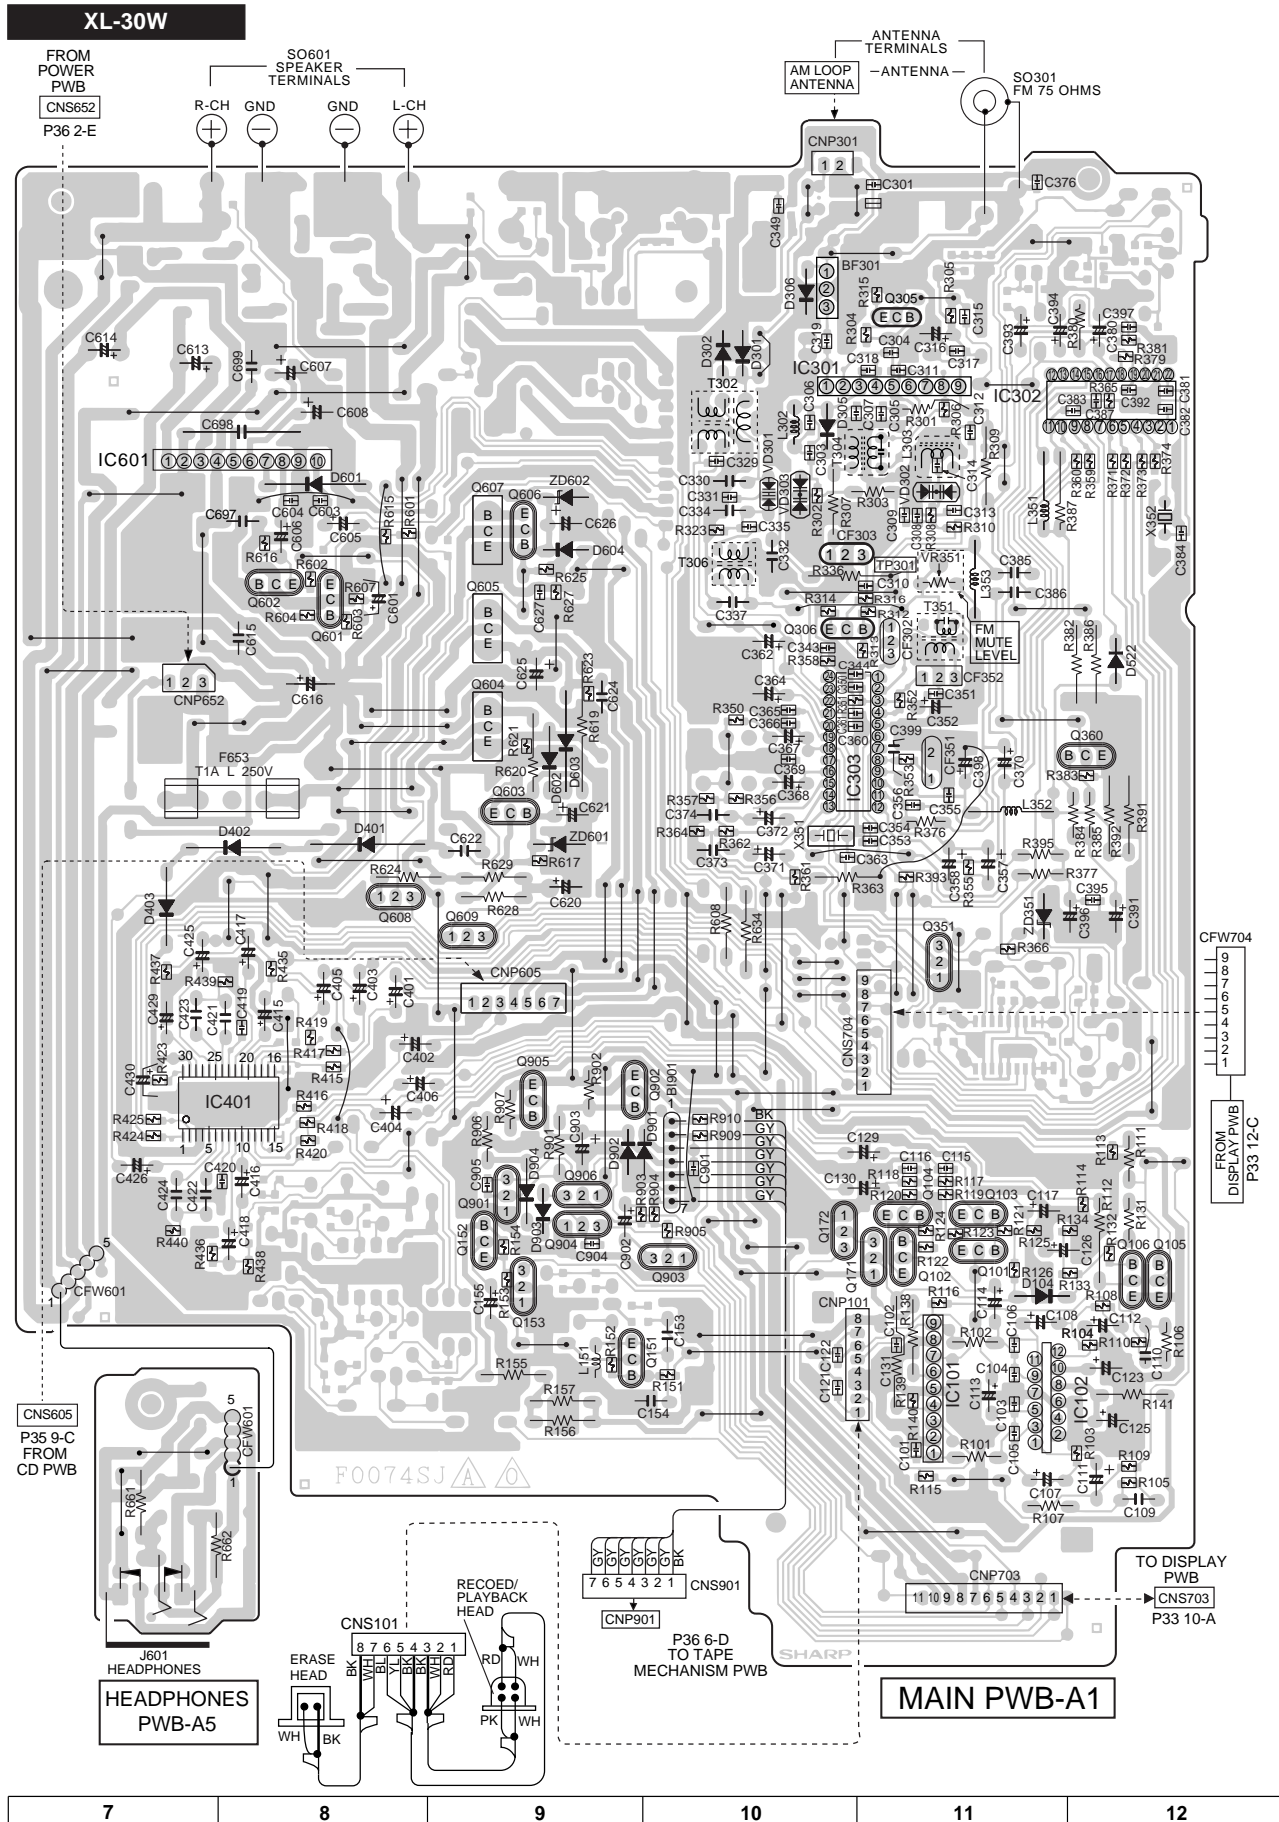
WIRING SIDE OF P.W. BOARD (2/7)
